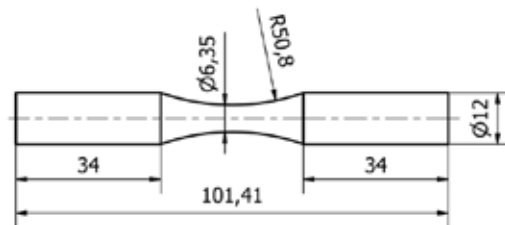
Specimen dimensions used on multiaxial fatigue tests.
